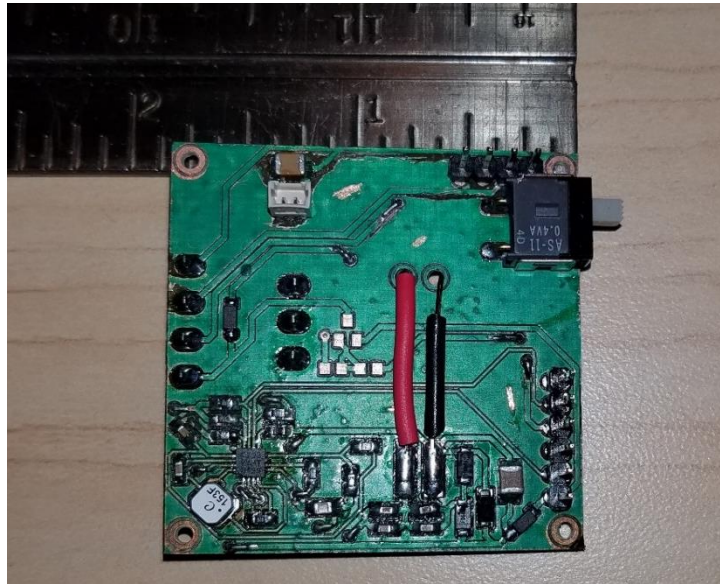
Top Face of the Assembled PCB for the Receiving Inductive Battery Recharging
